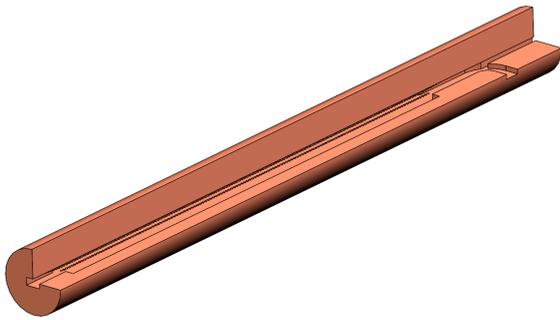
Diffusion bonded circuit assembly ready for cold testing
